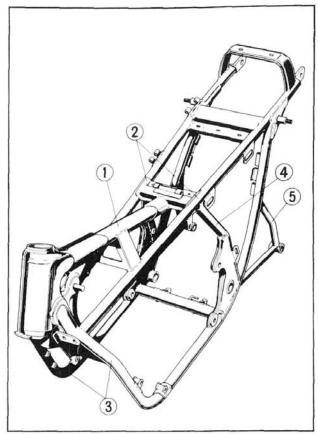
① Main pipe ② Sub tube ③ Under sub tube
